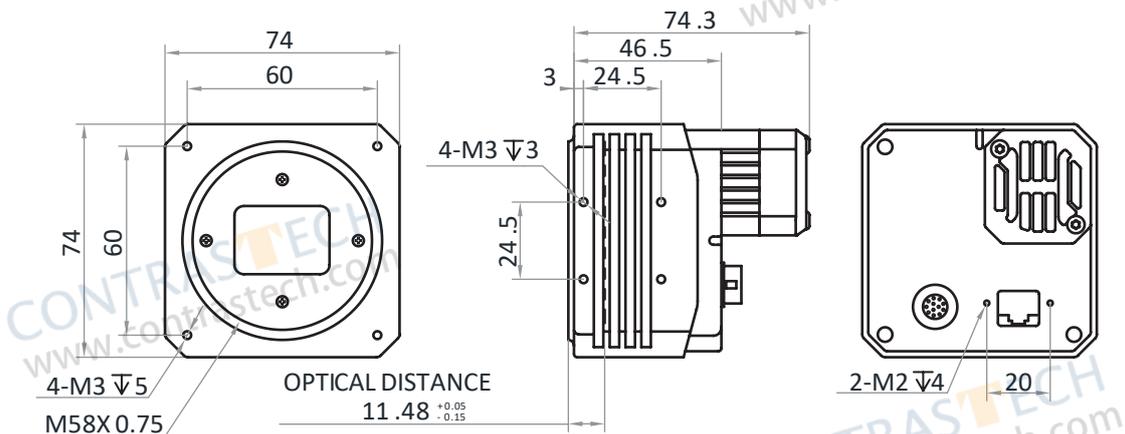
Mechanical Dimensions of the M58 GigE Cameras with 74 \* 74 \* 74.3mm housing (With fan, the installation uses M3 screws).
